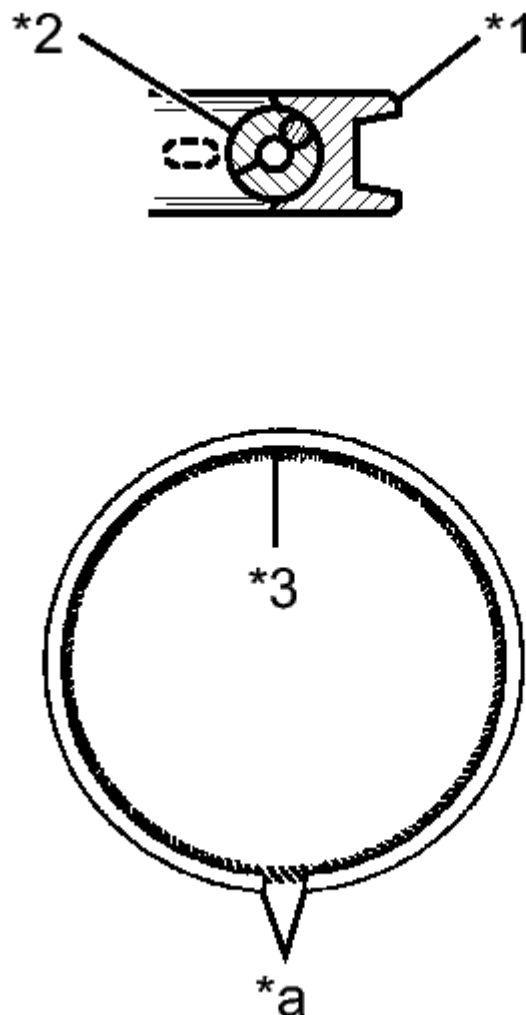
Identifying Oil Ring, Oil Ring Expander, Coil Joint & Oil Ring Ends
